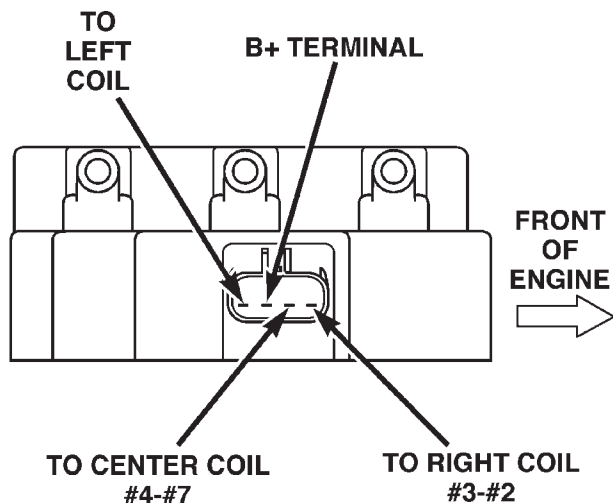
Checking Coil Primary Resistance—Front Coils—8.0L V-10 Engine
